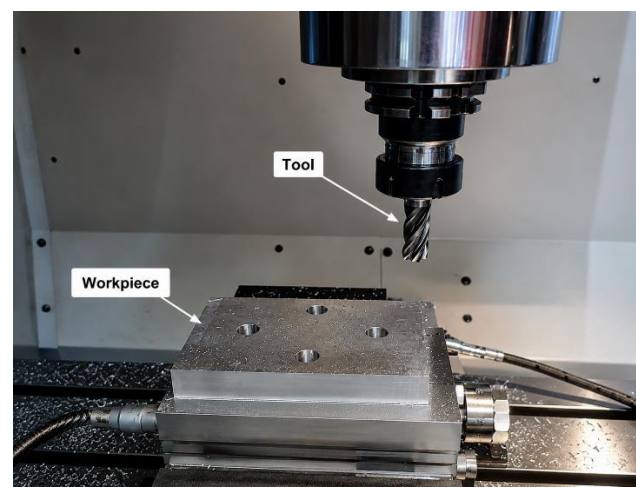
Cutting tool and workpiece configuration used in the high-efficiency milling experiments.
